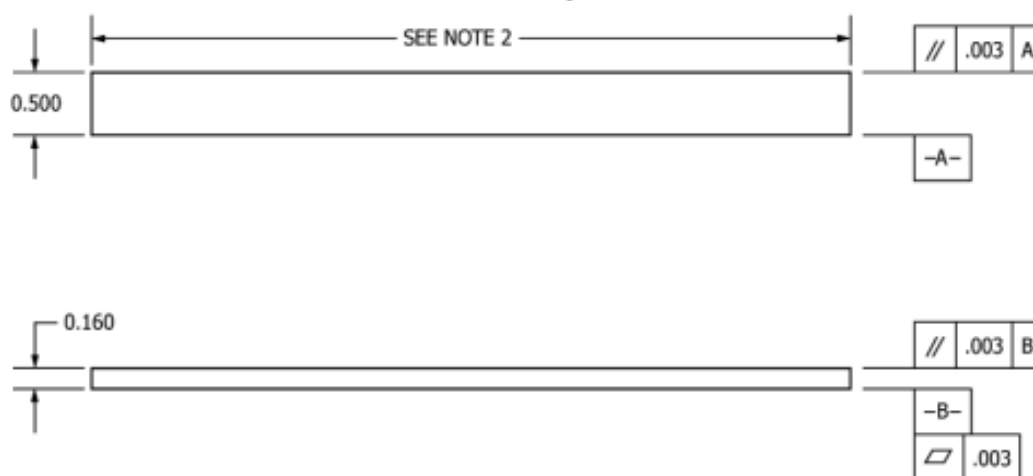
Standard Flexural Test Specimen Drawing (Inch-Pound)
